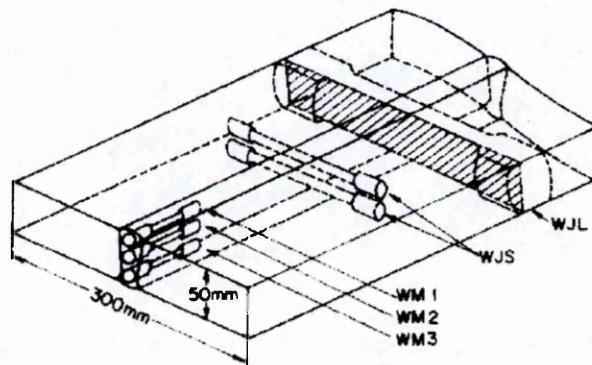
Sampling of test specimens from welded joint [25]
